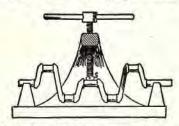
A shaft-straightening press: In straightening a bent shaft it is advisable to warm it slightly first. Then bend it far enough in opposite direction to which it is bent, so that it will be distorted the other way. The shaft is then brought to normal from this side. This prevents any tendency for shaft to spring out of line. Care must be exercised not to apply too much pressure in the first attempt and gradually to bend, and test after each attempt of straightening. Shafts are sometimes broken when straightening. Badly bent shafts, especially large ones (that are not hardened) are sometimes heated in order to bend them and then ground afterwards.
